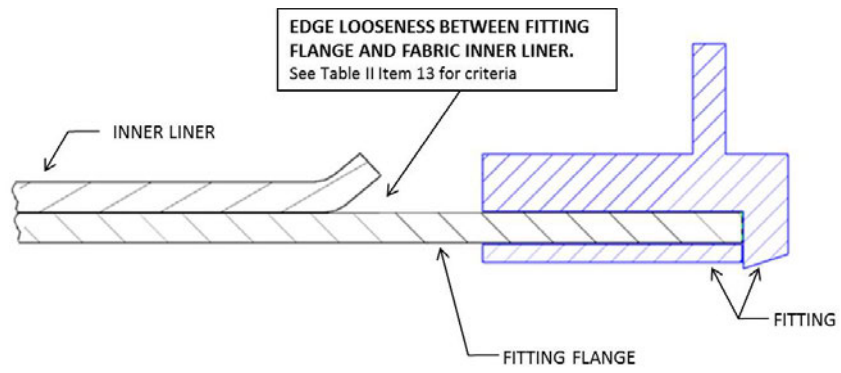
Edge looseness between fitting flange and fabric inner liner.
